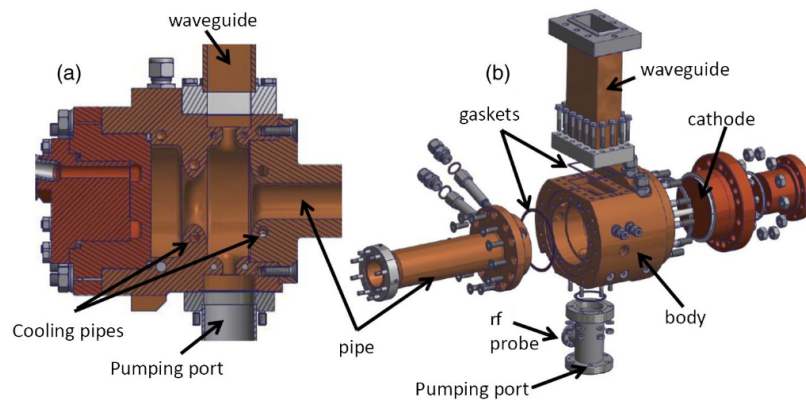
Detail of the ELI-NP gun mechanical drawing [33].
